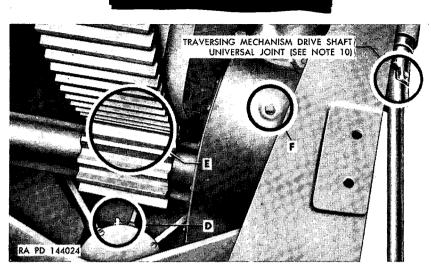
Localized lubrication points—155-mm howitzer mount M14—top carriage well.
